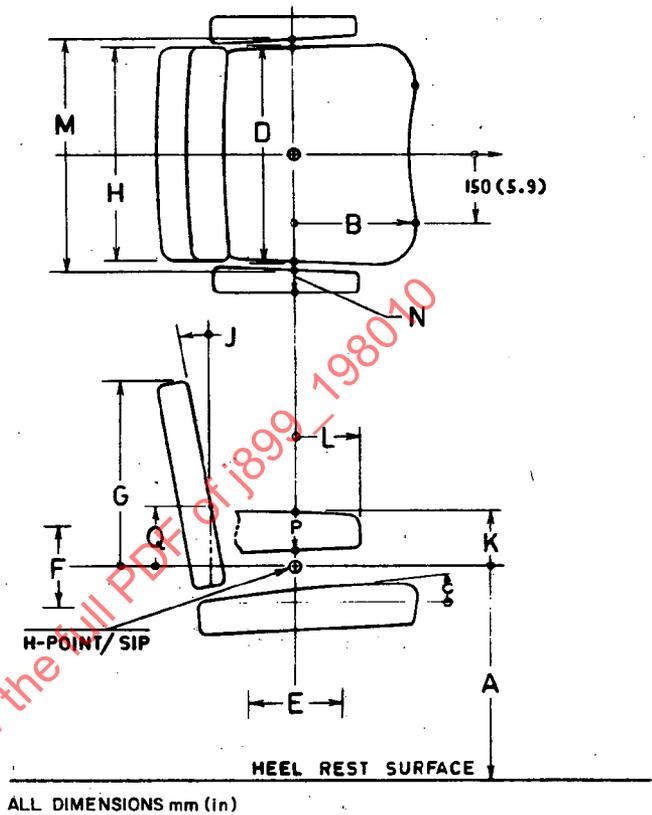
SEAT DIMENSIONS AND ADJUSTMENTS
